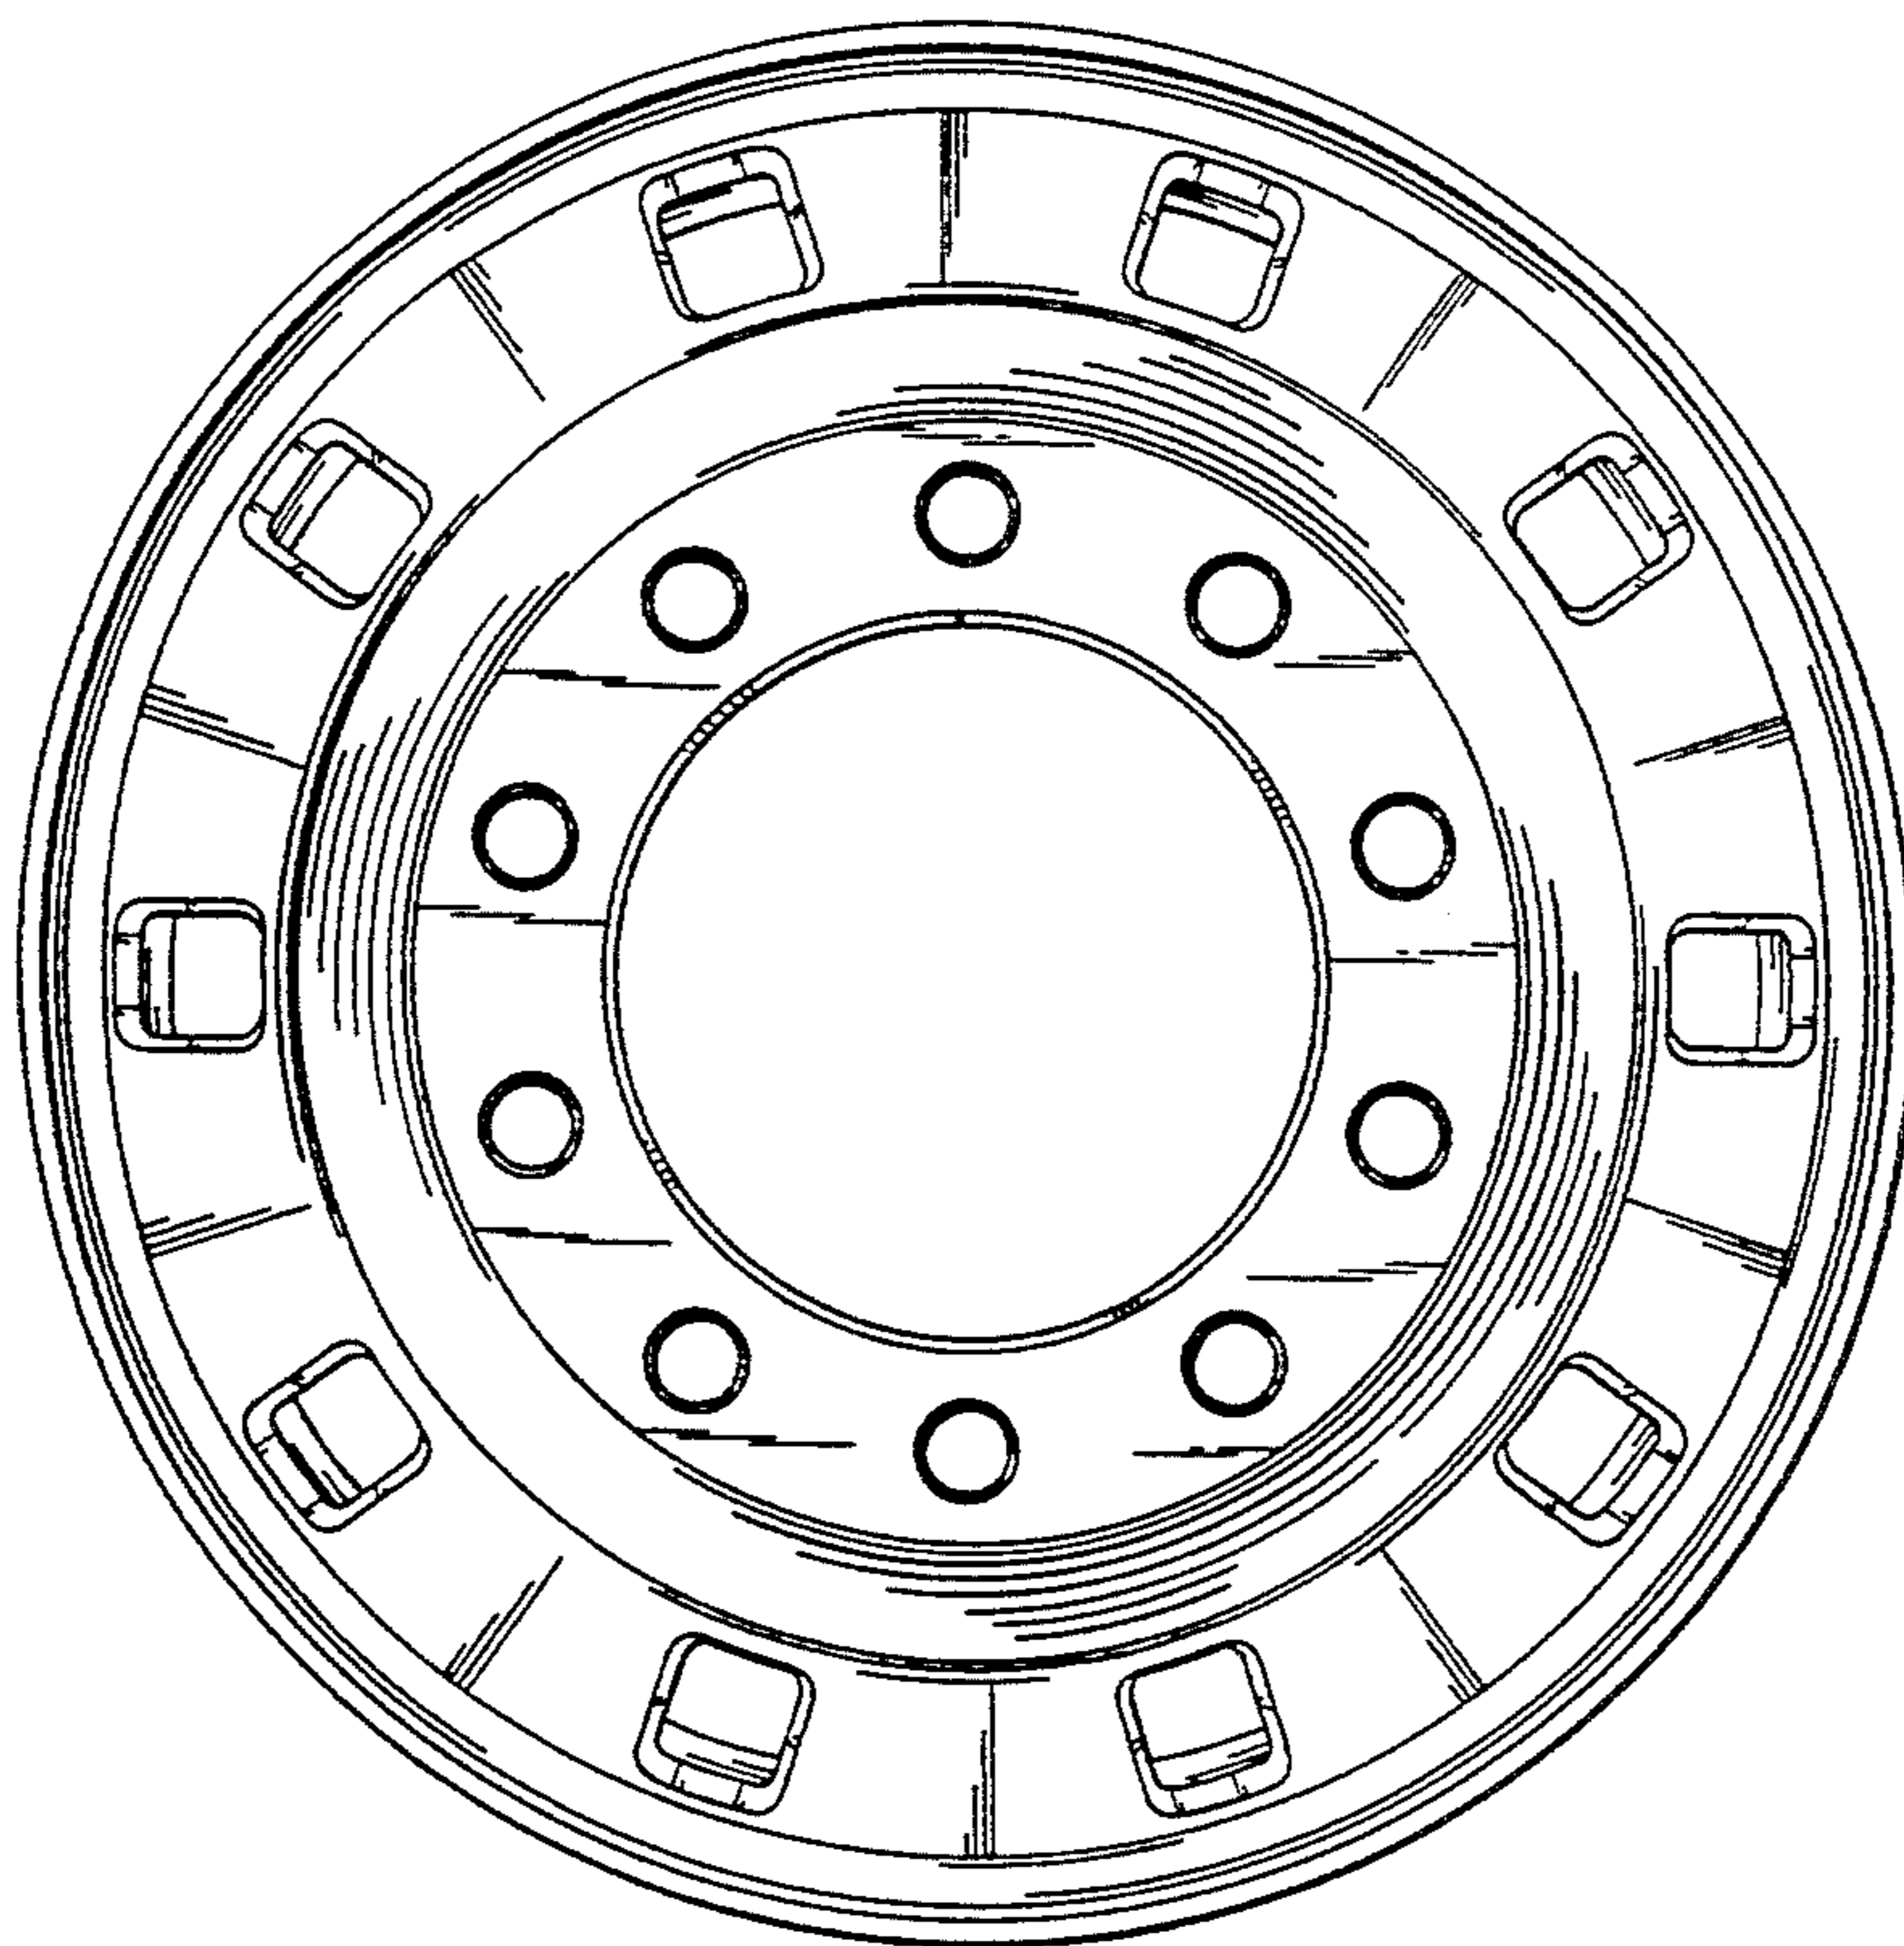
is a full frontal view of a vehicle wheel, showing my new design;
